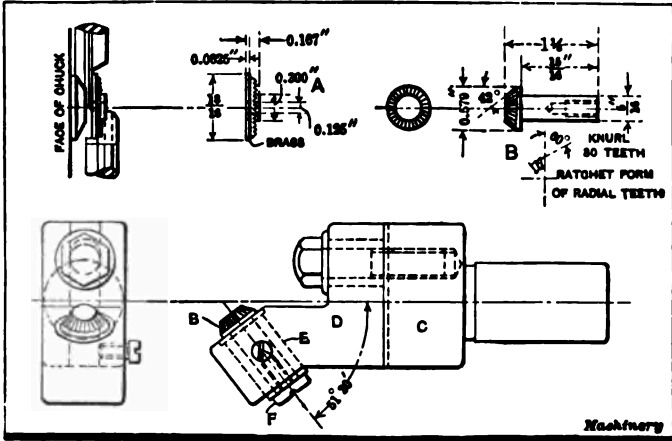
Knurl and Knurling Tool-holder for producing Ratchet Form of Radial Teeth
